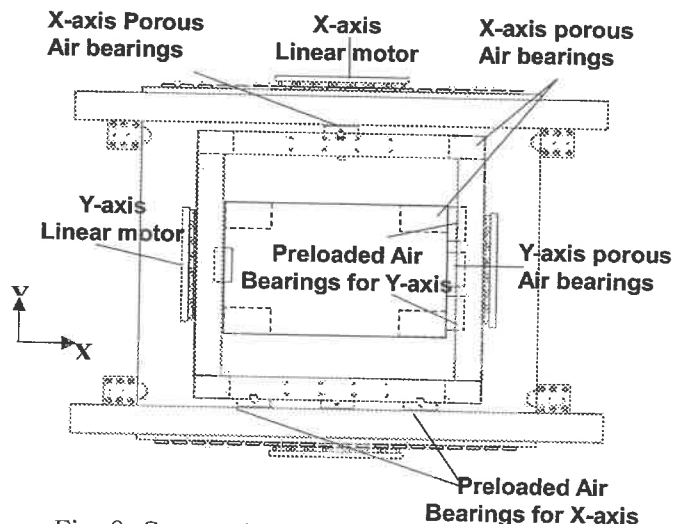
Coarse Actuator with linear motors, air bearings, and a window frame
